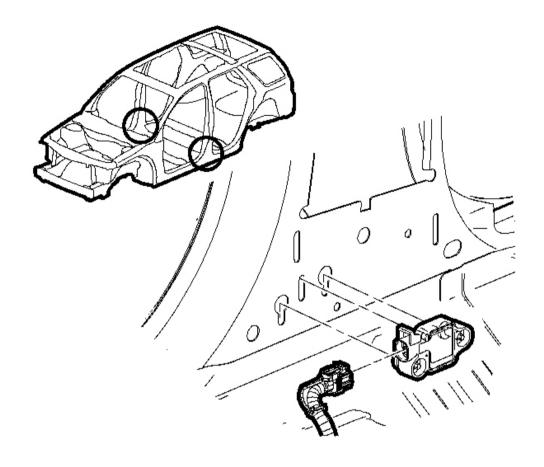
SIS Electrical Connector Courtesy of GENERAL MOTORS CORP.
